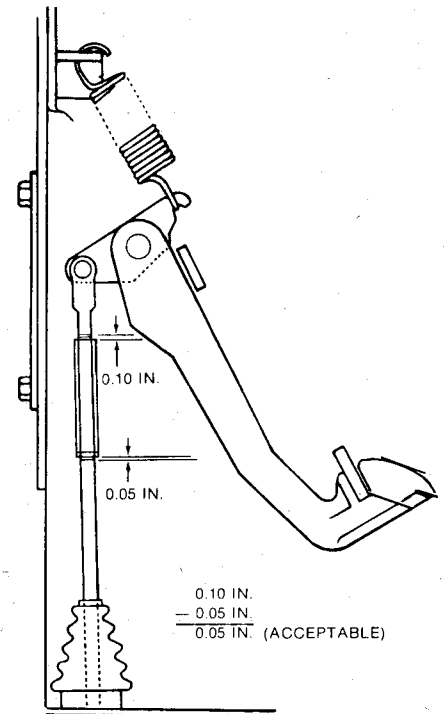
If control rod and adjusting nut are properly assembled, the difference between exposed threads of upper and lower rods will be 0.010 inch or less. See above example.
